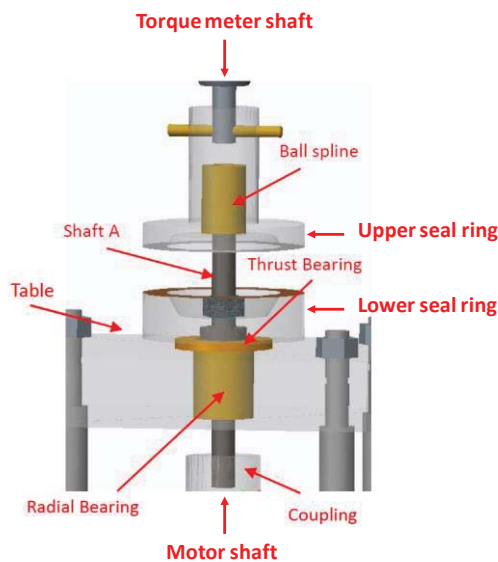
Conceptual design of the mechanical face seal demonstrator core area: seal rings, bearings and shafts
